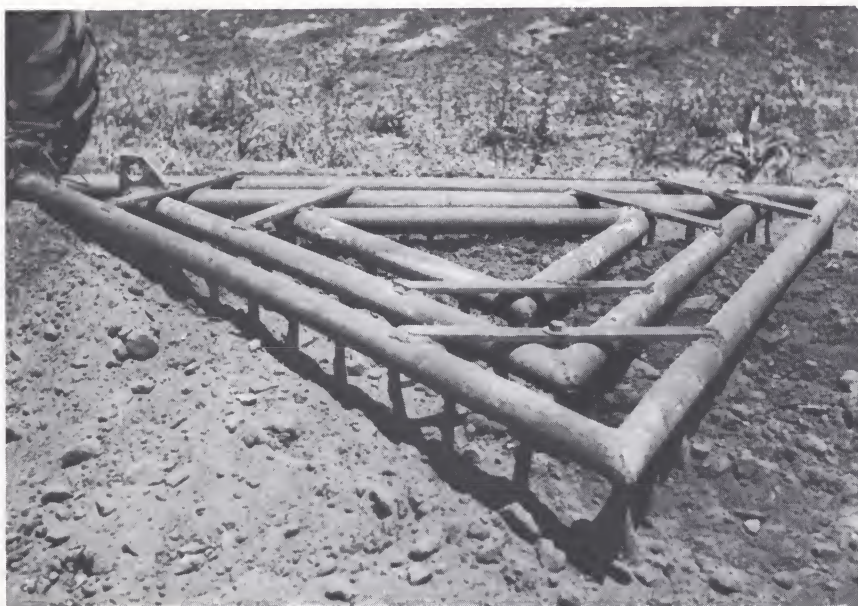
This job-built nail drag is made of pipe welded into an "A" frame with pointed bolts for teeth.
